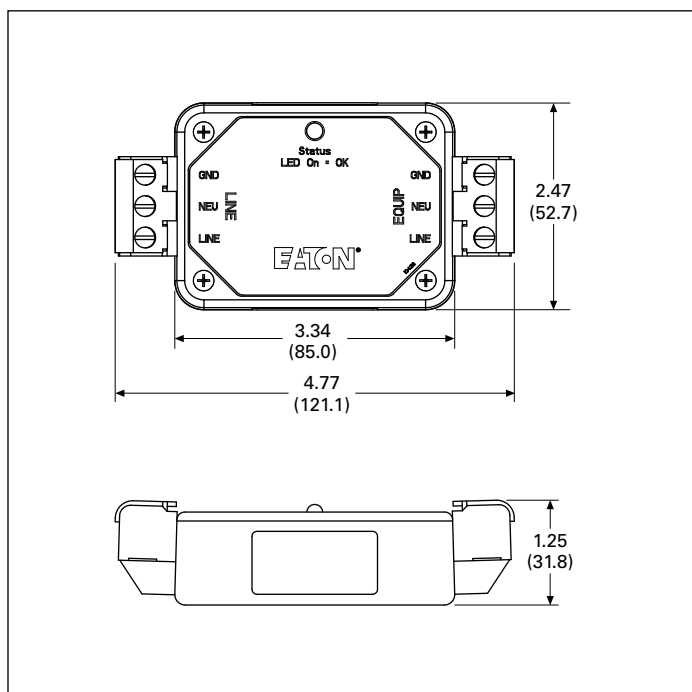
AGCF12010-CP Dimensions in Inches (mm)
